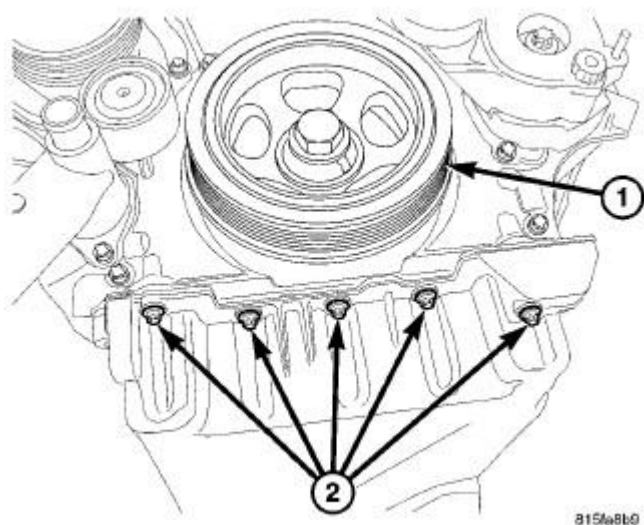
VIBRATION DAMPER & FRONT OIL PAN BOLTS
